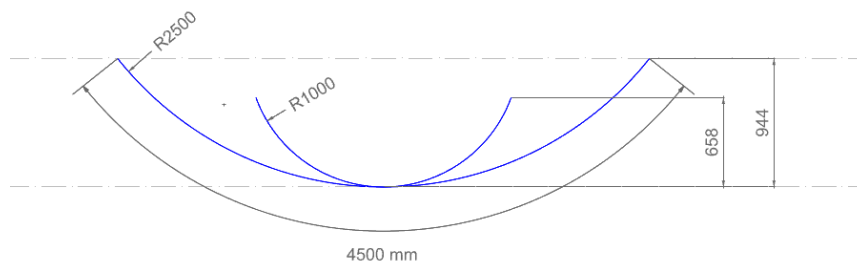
Machine bending radii. Oven for smaller lengths with deeper quenching section.
